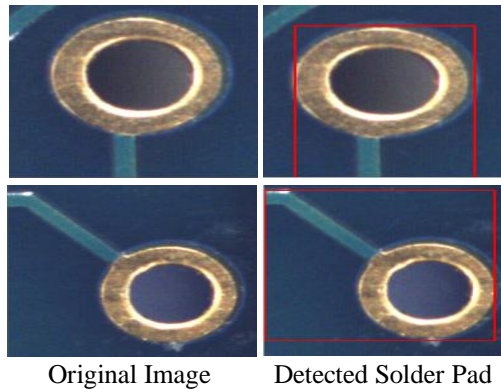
False detection of solder pad areas due to light colour PCB tracks on gold-plated solder pads on blue colour PCBs
